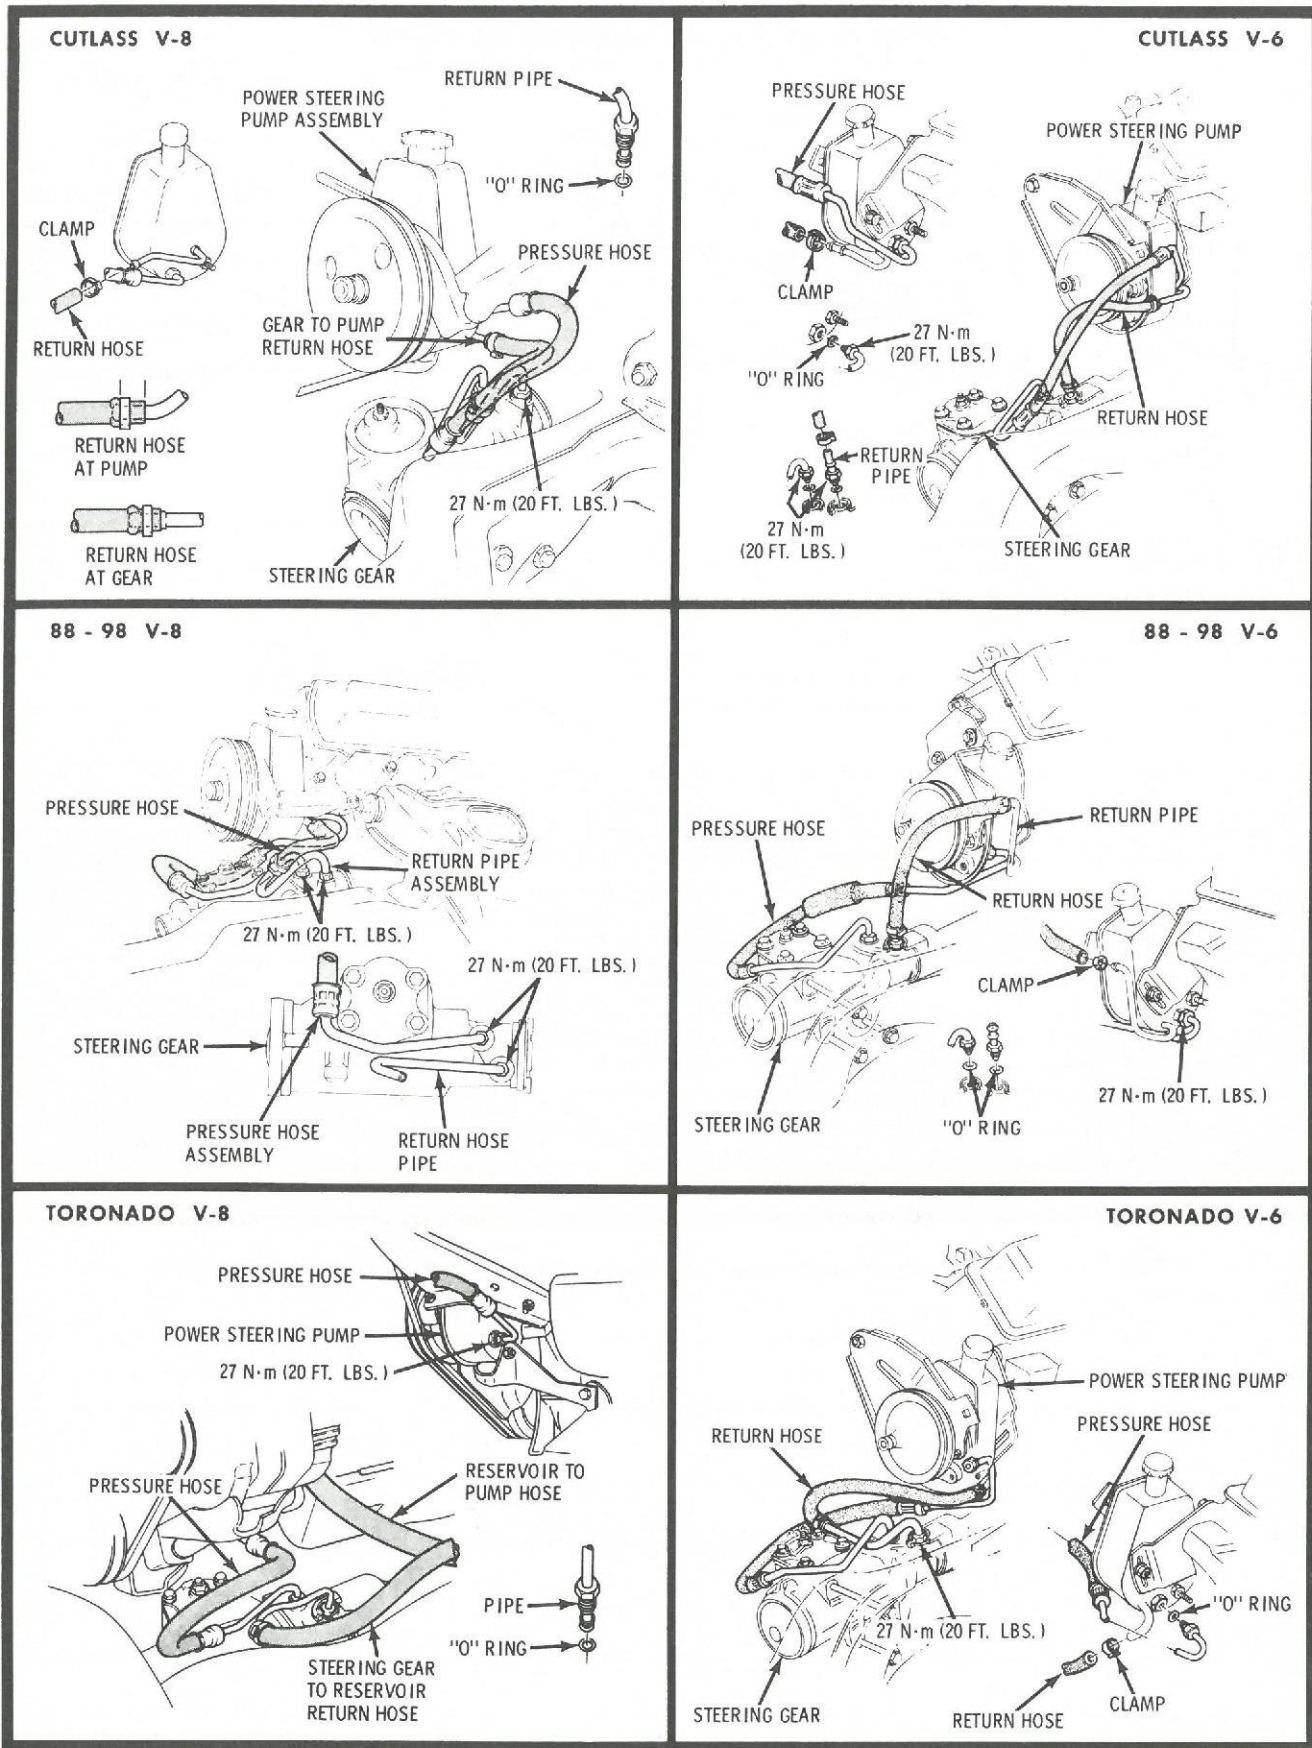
Power Steering Hose Routing (Gasoline Engines) - Replaces Figure 3B3-7
